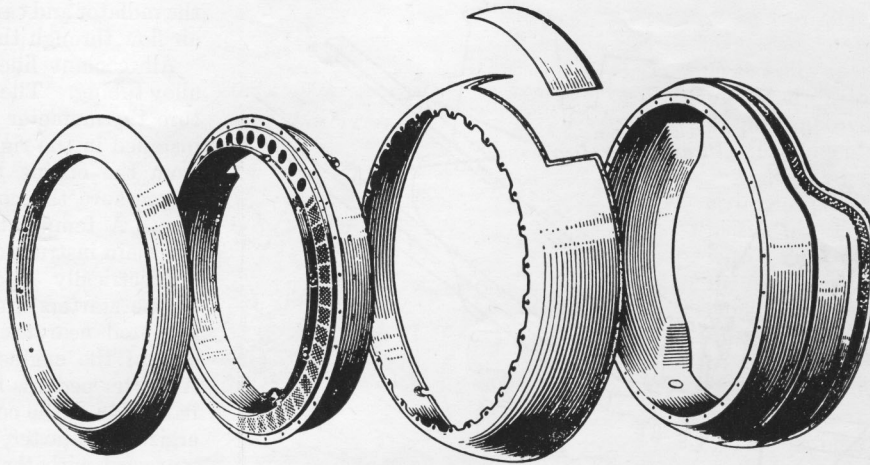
The oil cooler of the FW-190 is set behind armor plate in the nose of the engine cowl. The exploded view shows (left to right) armor plate, oil cooler, armor plate, and cowling.
